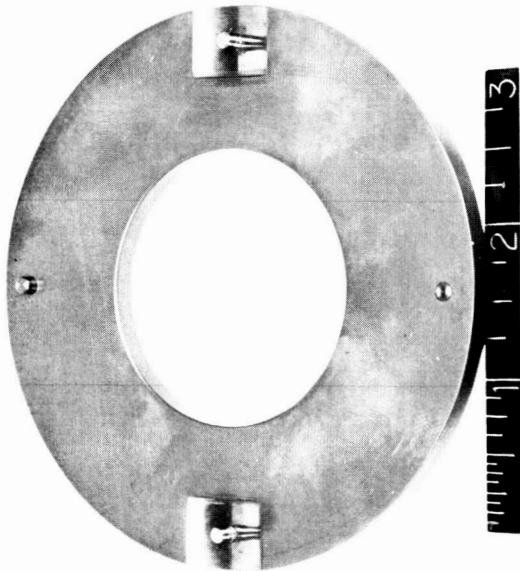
Motor end thrust bearing gimbal ring showing loose pin.
